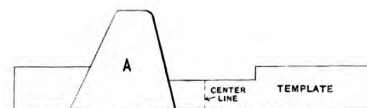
Template for Hollow Parts of Wheel Marked A A.
